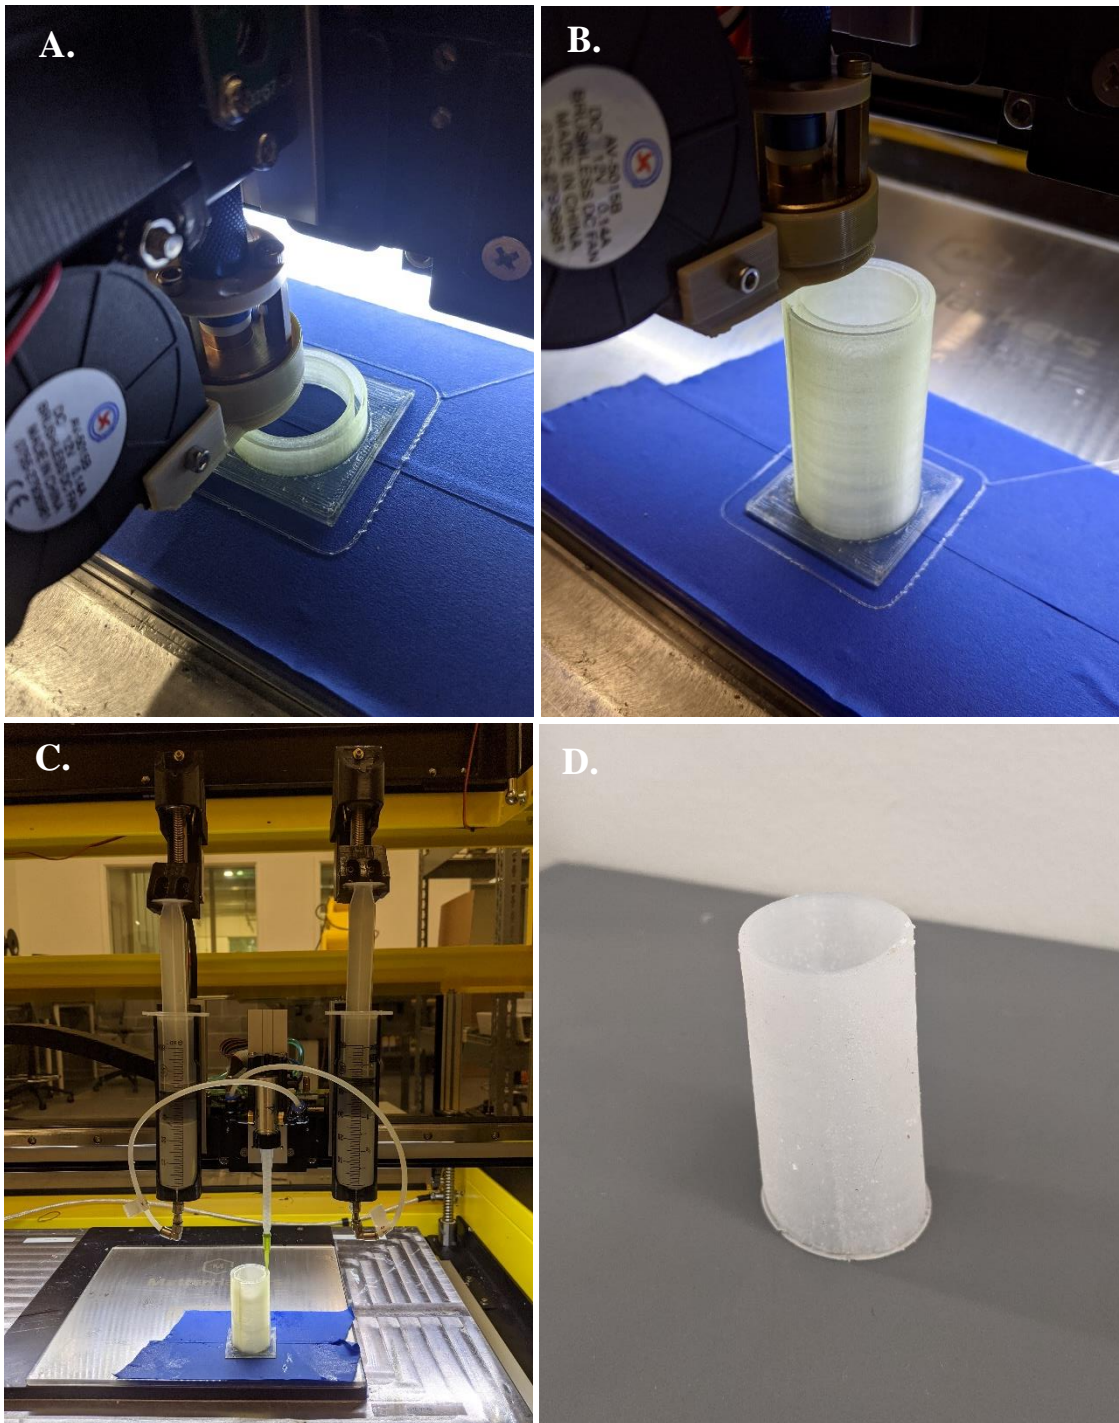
(a) PVA Printing First Stages (b) PVA Printing Final Stages (c) Dynamic Silicone Mixing Head Inserting Silicone into PVA Mold (d) Finished Silicone Shell
